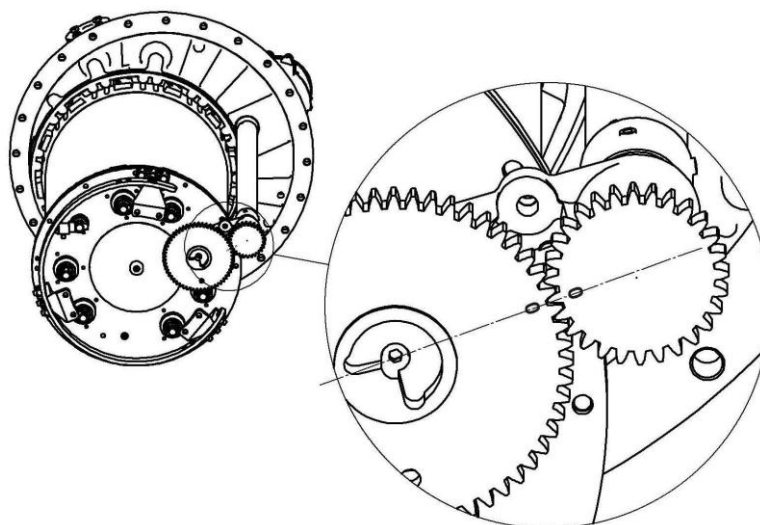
Marking “O” of the gear wheels of the oil compartment
